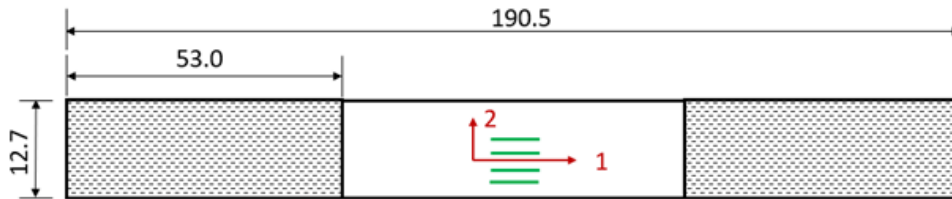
Typical specimen geometry and layout (all dimensions in mm).
